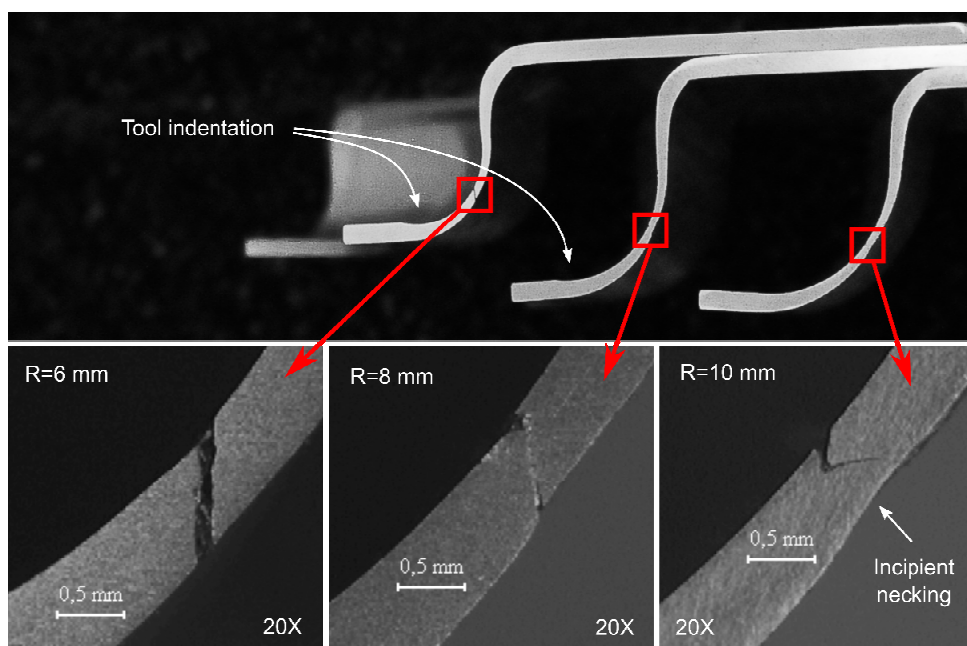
Fractographies of the failure zone for failed tests
